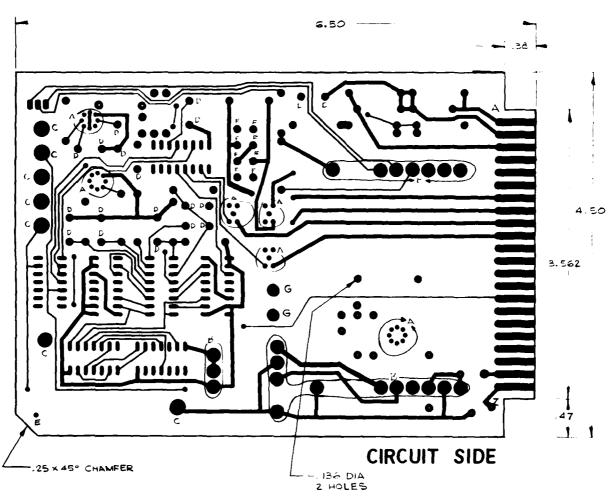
Searchlight Control Card I (A5) Assembly Drawing.
